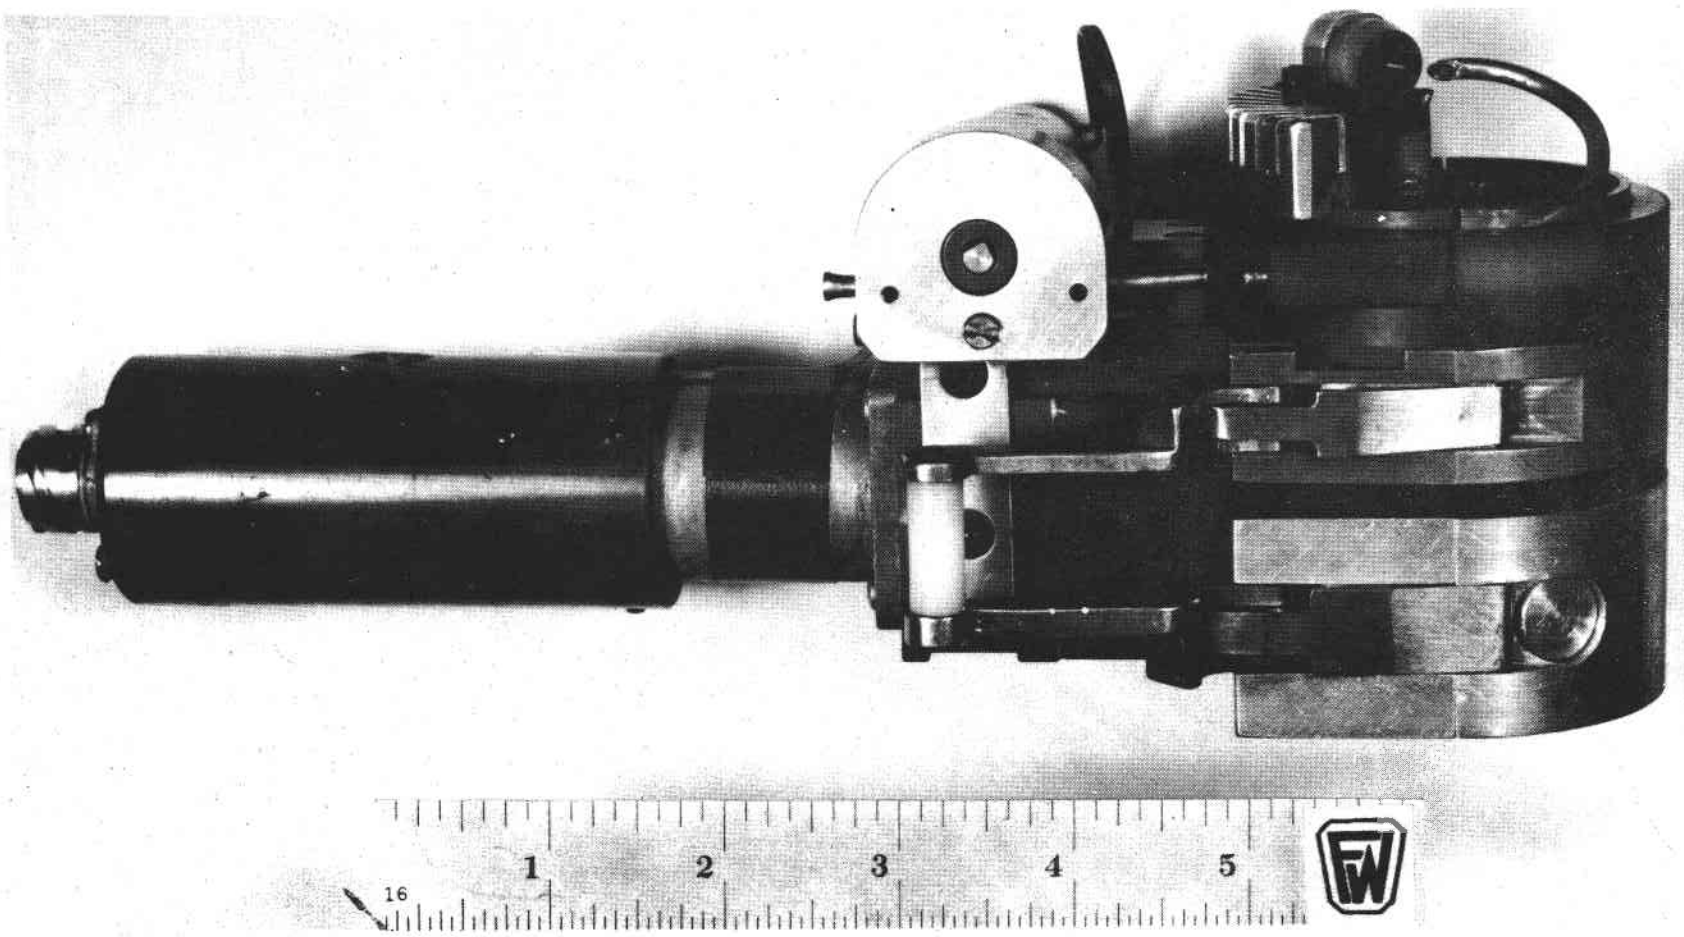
Side View of Miniature Tube Orbital Welding Torch
